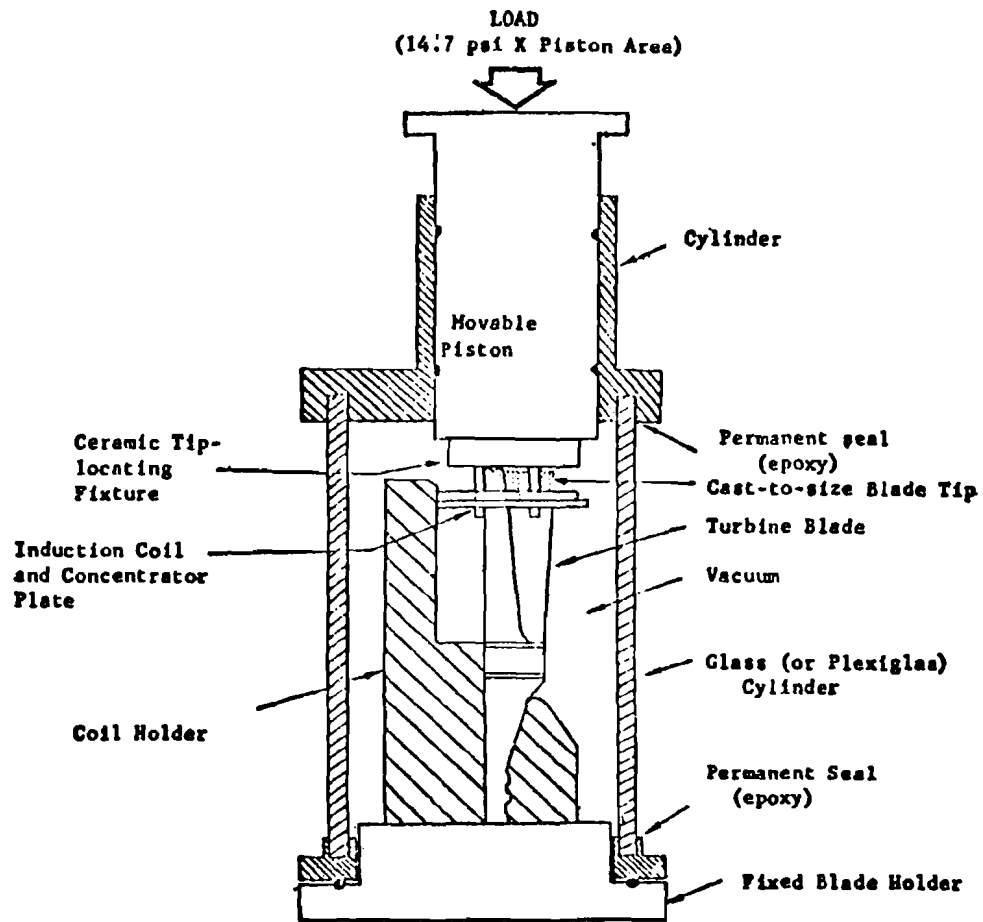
Schematic of the Mini-Bonder Showing the Chamber, the Coil, the Blade (& Tip) and Movable Piston
